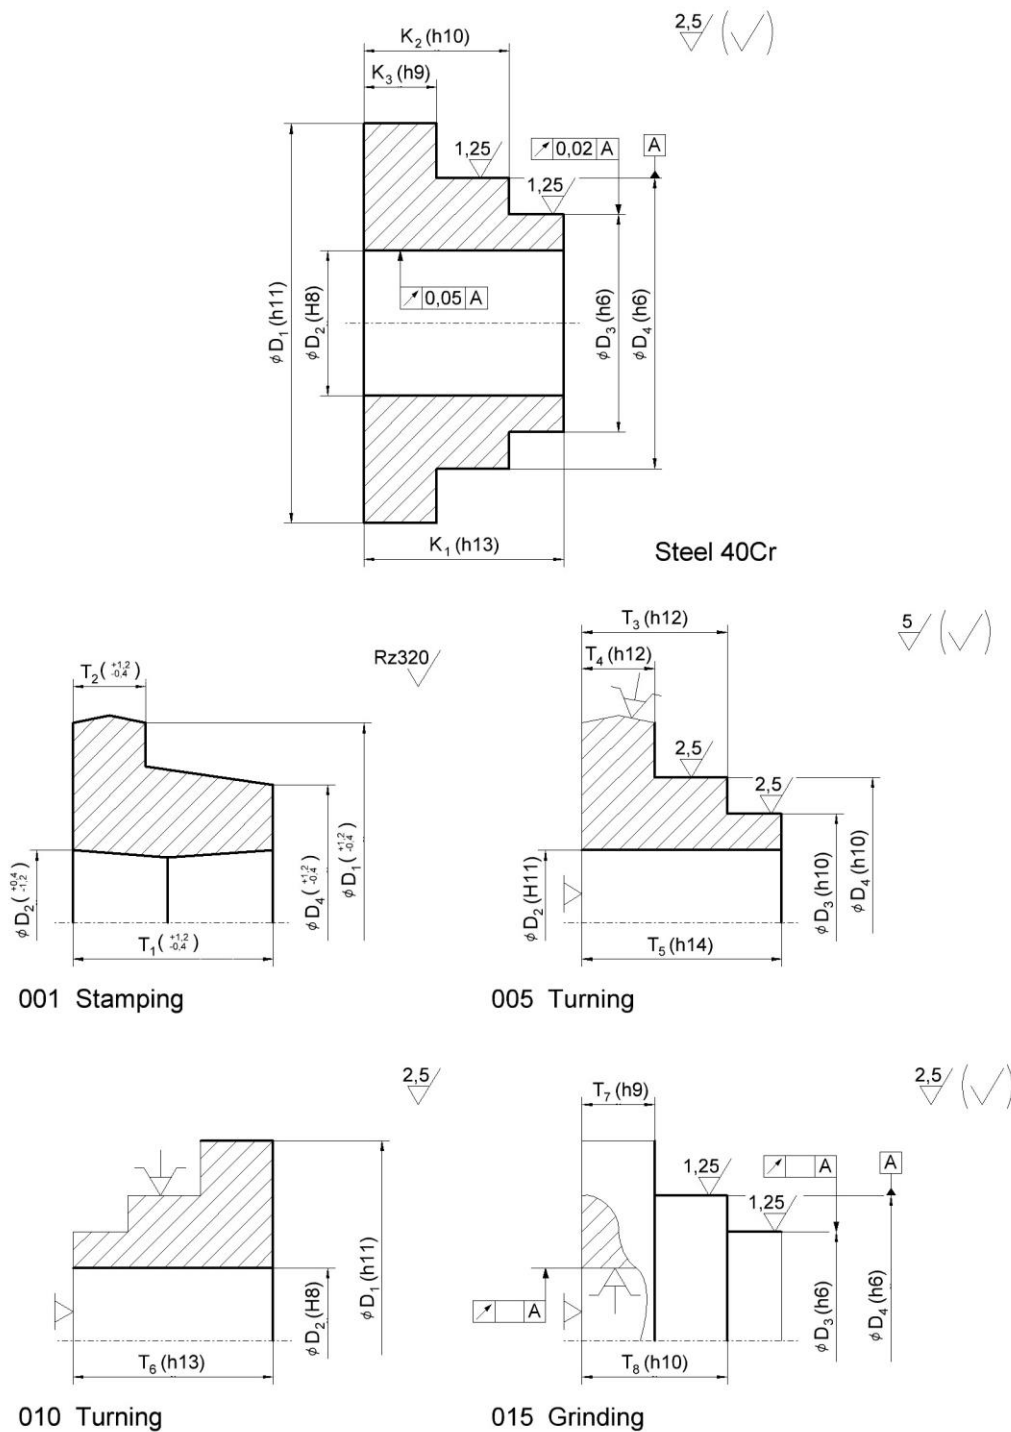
A sketch of an axisymmetrical part, operational sketches with the referencing schemes and the structure of operational dimensions.
